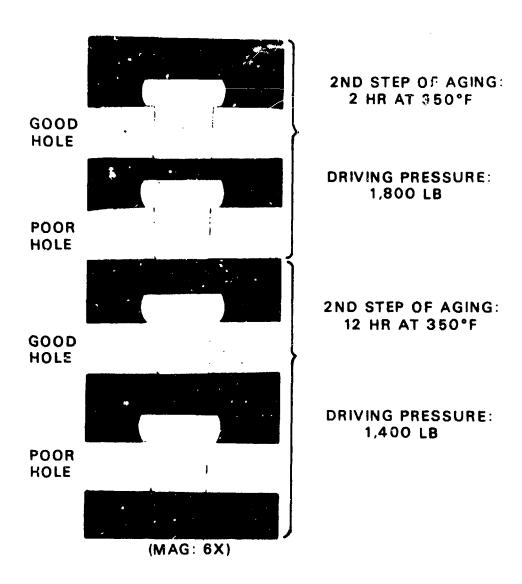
Photomacrographs of Sectioned 0.092-in. Diameter (D) 7050 Slugs Driven With 1.5D Flat Head in 0.090-in. 2024-T3 Sheet
